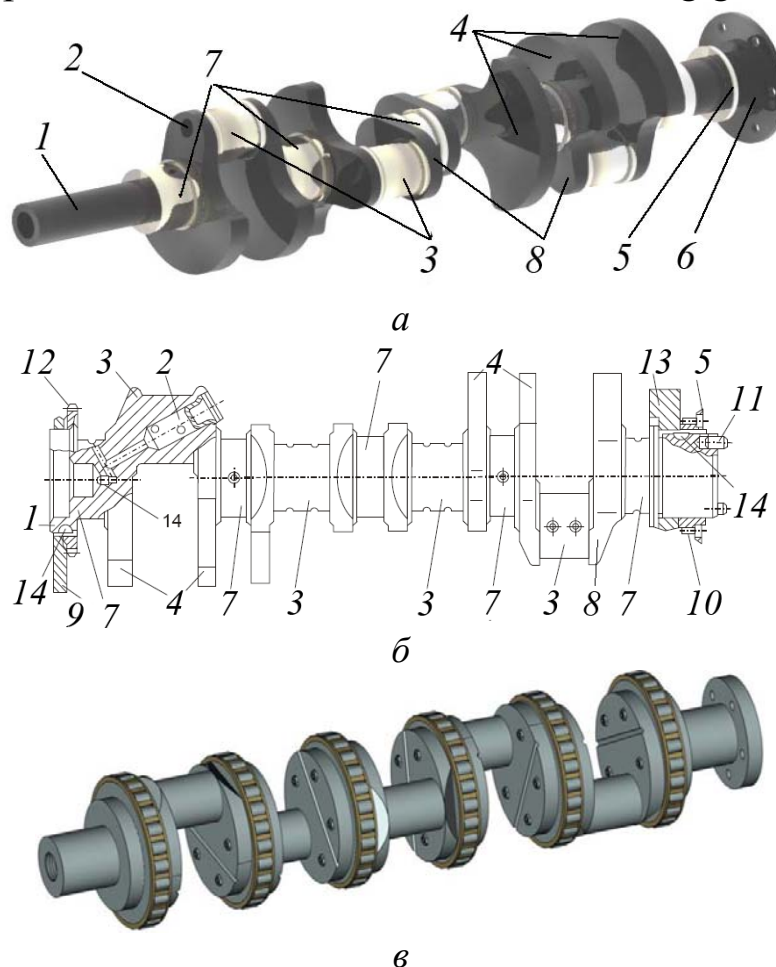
Varieties of crankshafts: a – crankshaft of ZIL - 130 car engine; b - the crankshaft of KamAZ-740 diesel engine; c - collapsible crankshaft of TATRA-815 vehicle;
